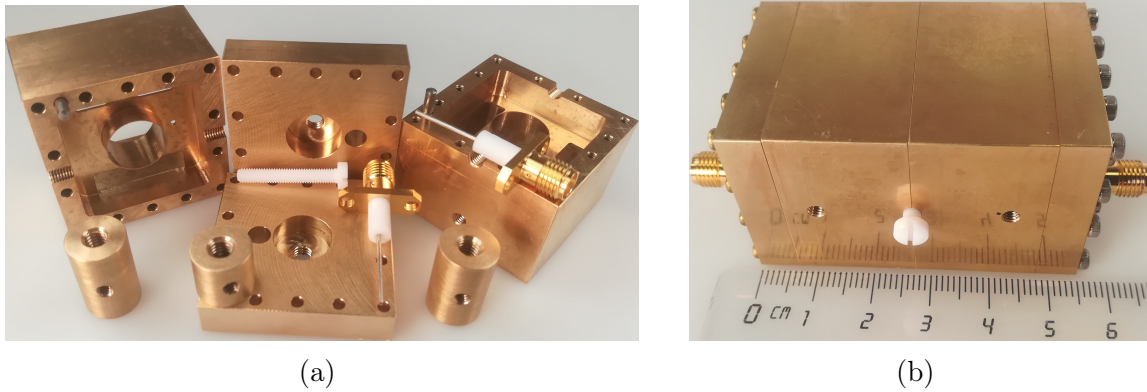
The fabricated longitudinal inset filter. (a) Disassembled parts. (b) Final assembled prototype.
